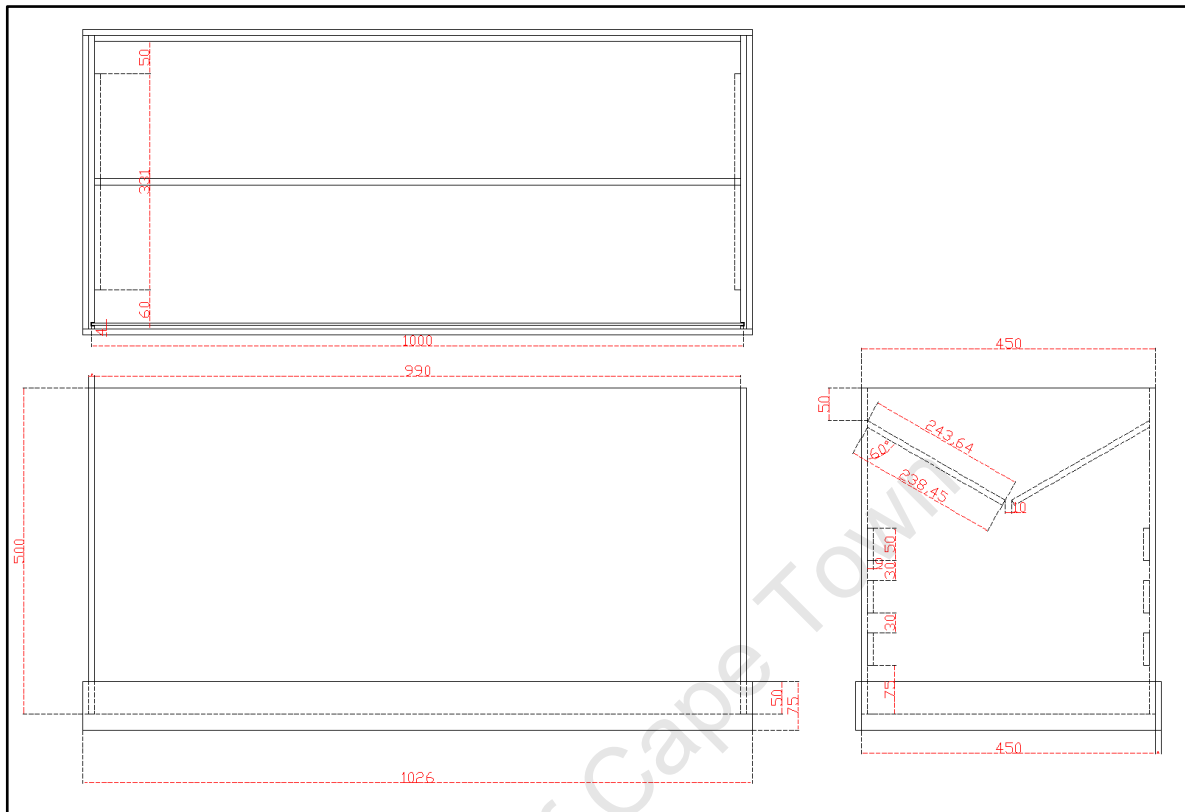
Mechanical drawing showing the design of the diffuser stage used for evenly spreading polystyrene foam balls inside the testing rig. All dimensions in millimetres.
